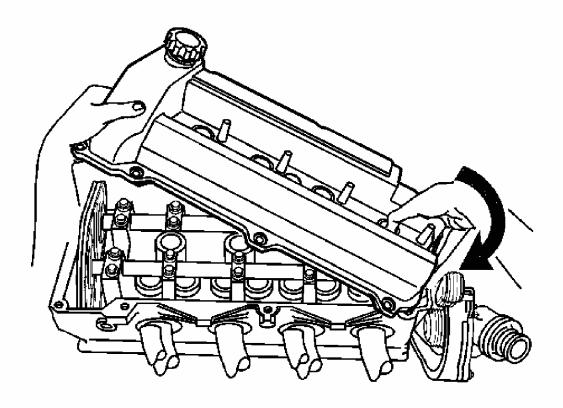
View of Intake Camshaft Courtesy of GENERAL MOTORS CORP.
